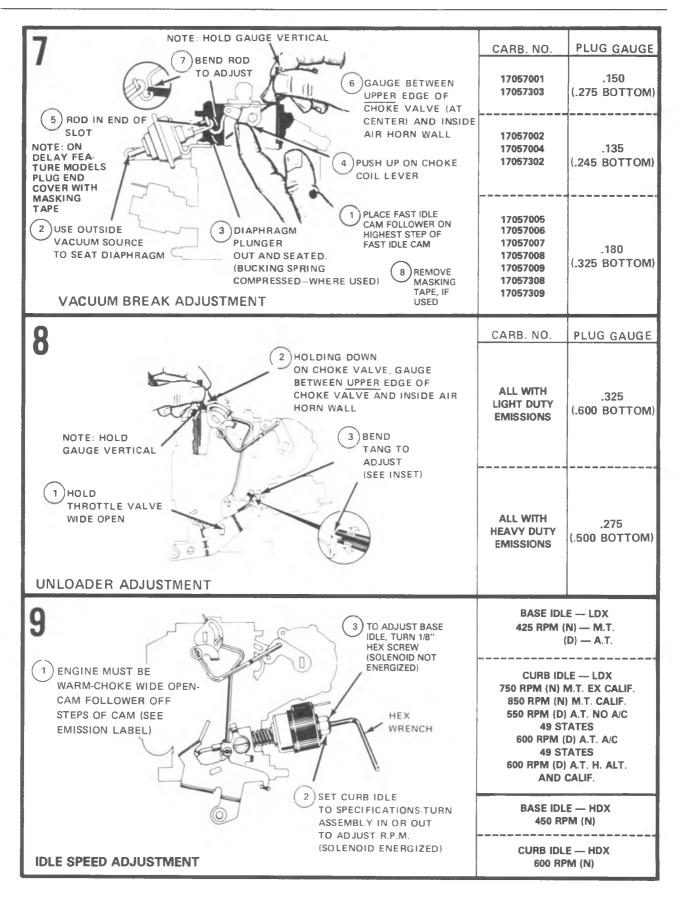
C-11--1ME Carburetor Adjustments - 3 of 3
